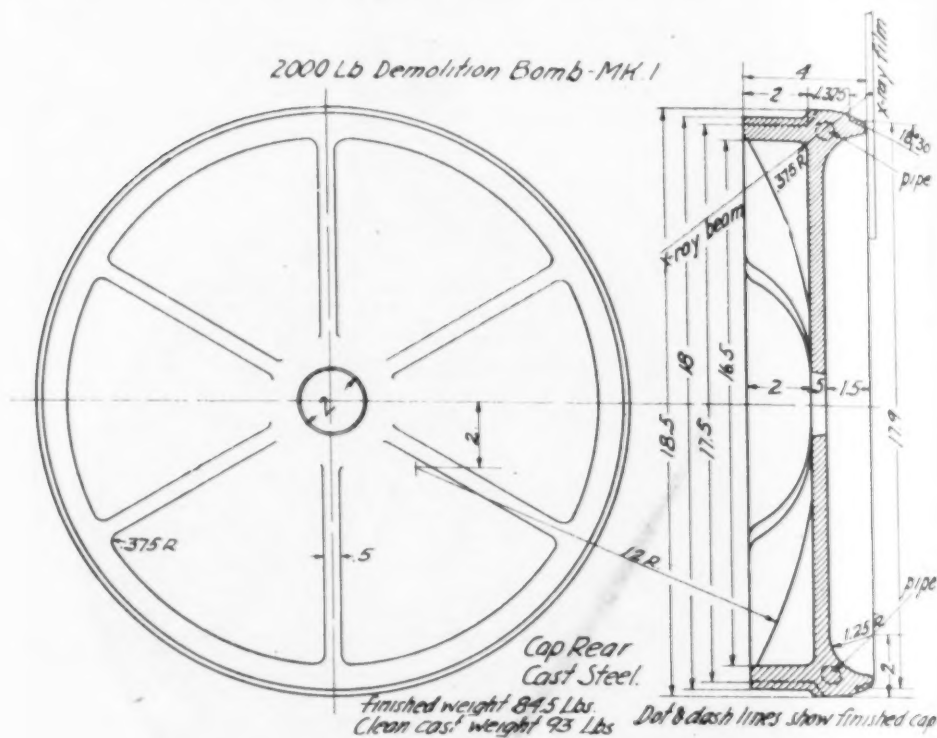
Drawing of the Steel Casting Shown in Fig. 15, Indicating Method of Taking X-Ray Photographs through the Filleted Section.
